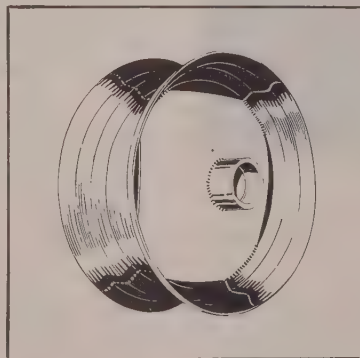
Stronger and more durable* all welded steel front wheel for farm tractor now used.
